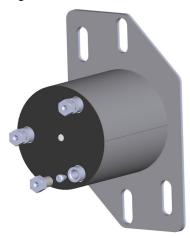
Gas Tubes Connection to the Auxiliary Gas Interface - External View(
